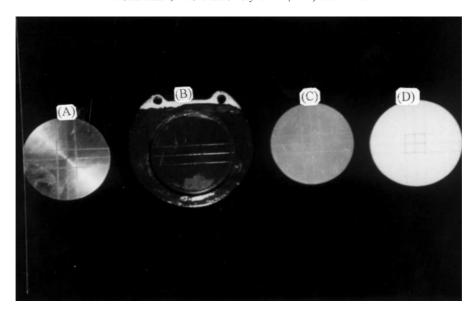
(A) Brass mold. (B) Silicon elastomer mold. (C) Wax pattern specimen. (D) Acrylic (composite) specimens.
